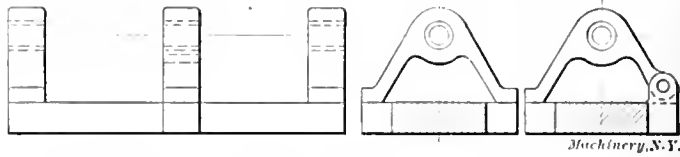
Boring Jig with Removable Bearing in the Center, adapting it to Different Sizes of Work of Similar Character.
